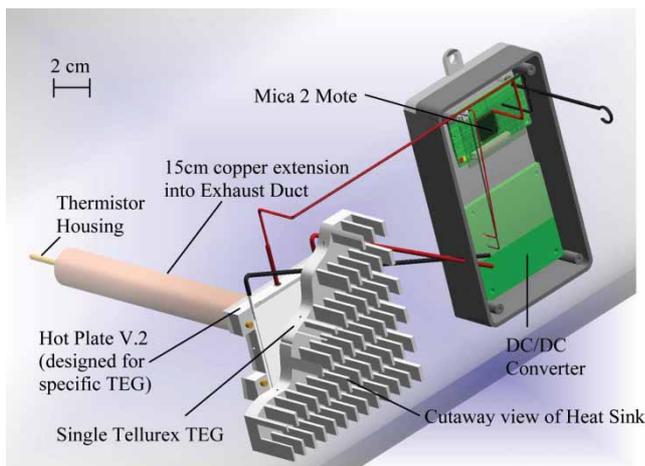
CAD drawing of the final duct temperature measurement device and TEG housing used at Alcoa
